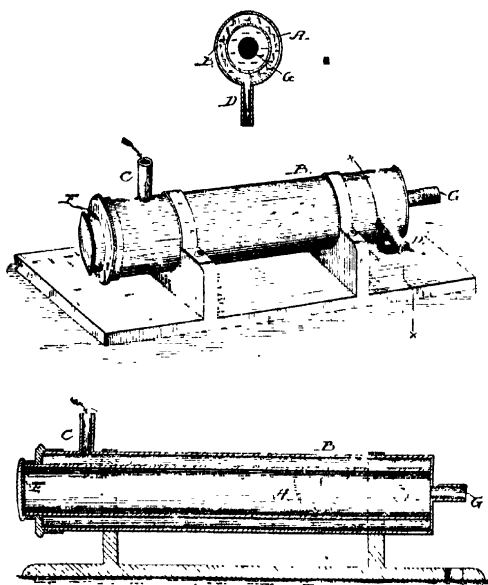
The "Hyatt Gun Method" of Celluloid Billiard Ball Manufacture.
